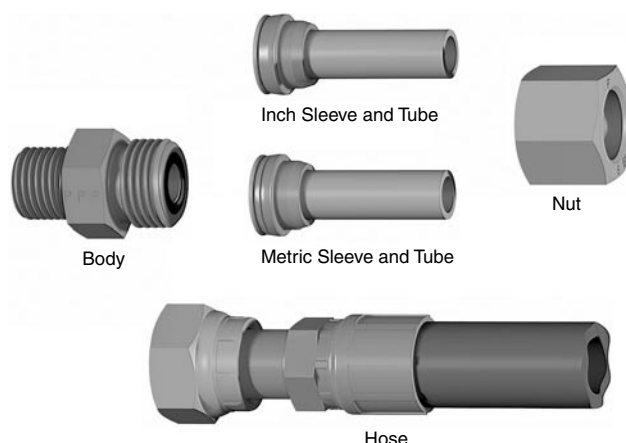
Seal-Lok Works with Inch or Metric Tube and Hose
